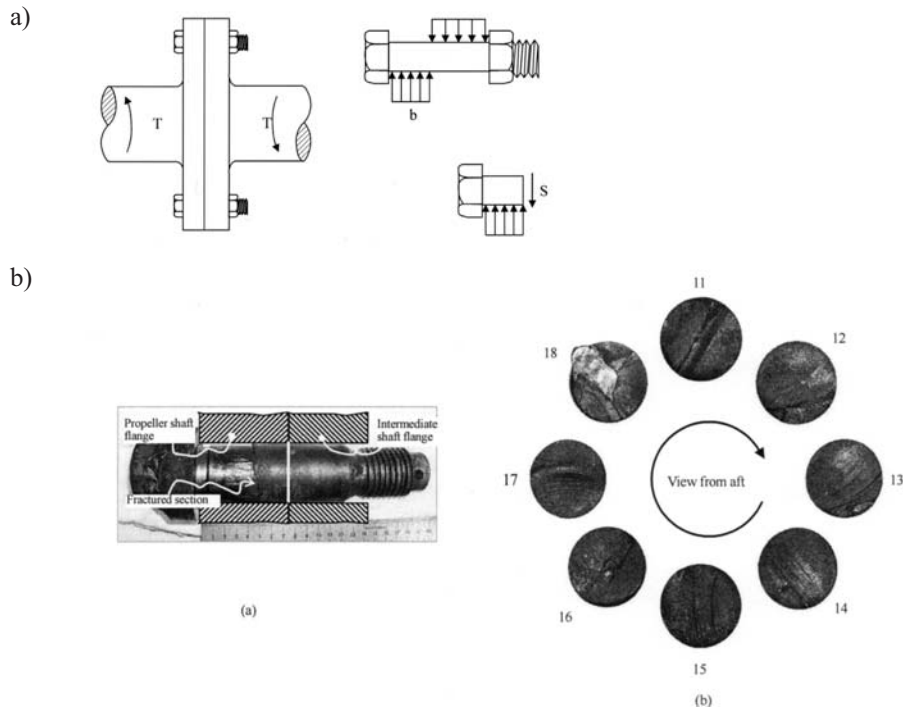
a) Bolted connection of the shaft collars and collar with broken bolt, b) View of the fatigue cross-section with original position of the broken bolts in the shaft collar [5].
